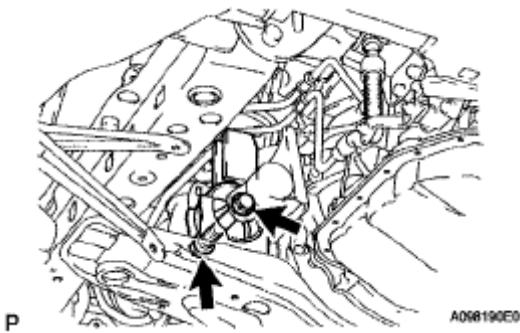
Locating Front Engine Mounting Insulator With Bolt And Nut
